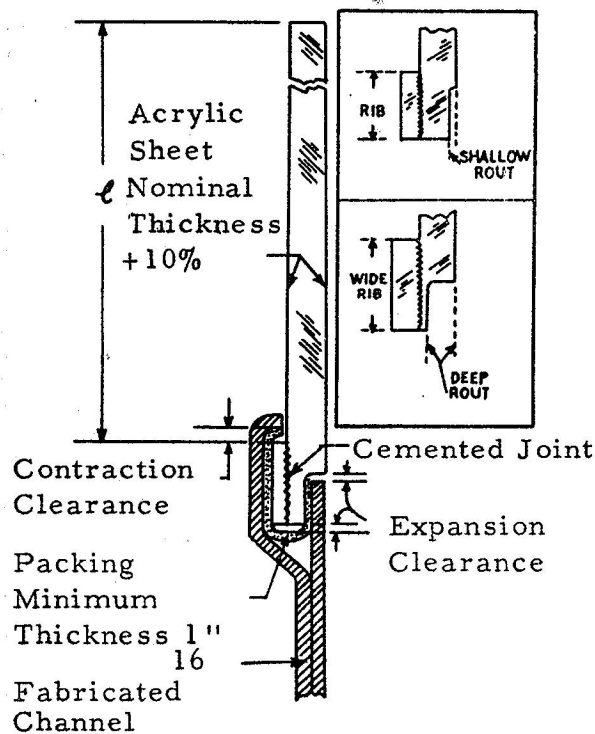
Clamp Installation With Reinforcing Rib Routed to Permit Flush Mounting
